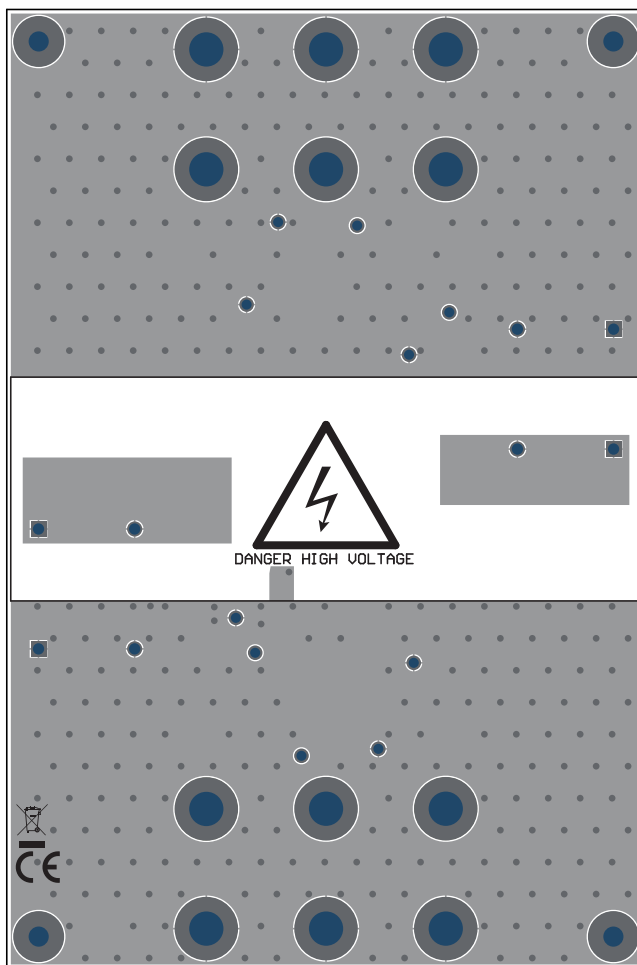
RES60EVM PCB Composite (Bottom View)
